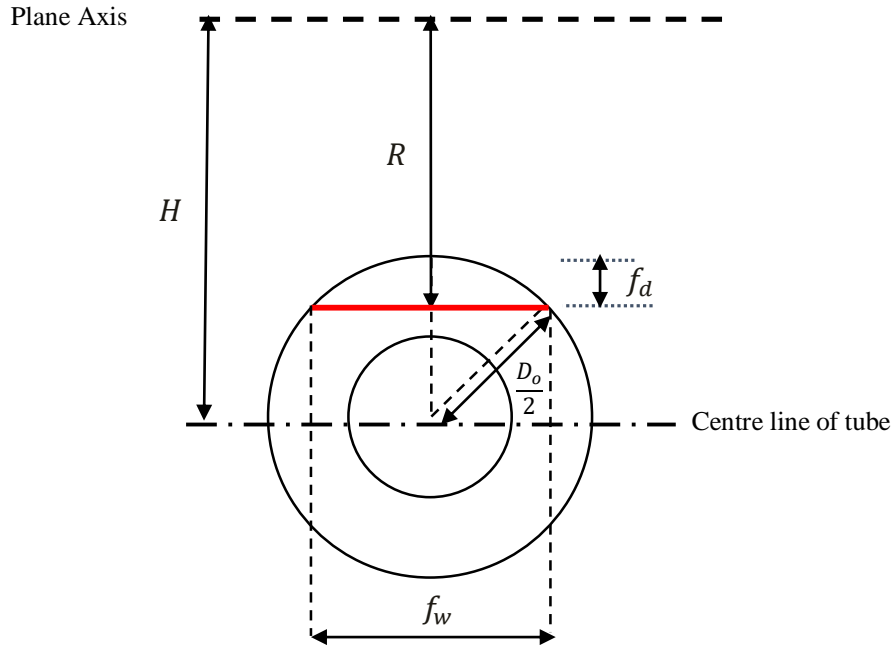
Front view of the flat line flow showing the cutting plane in red, intersected with the tube cross-section.
